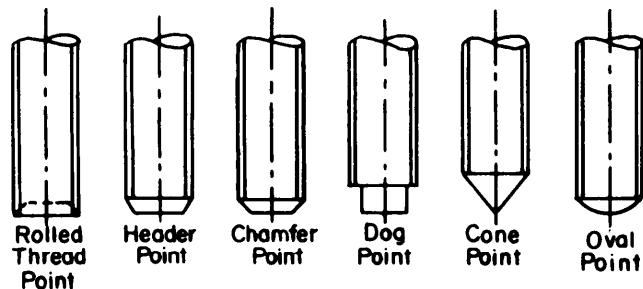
Types of Thread Point Commonly Encountered in Assembly Operations
